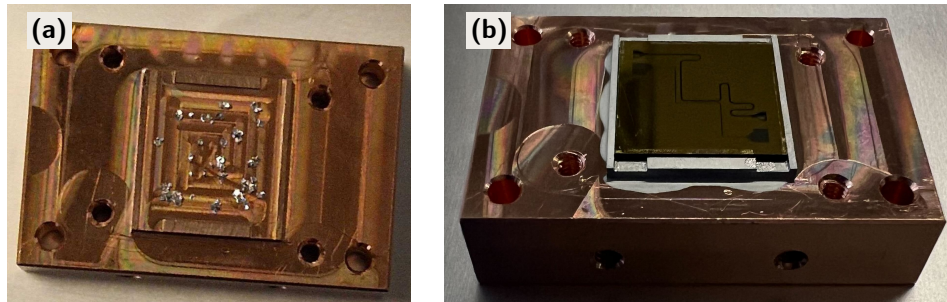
(a): Photograph of the sample holder with indium flakes for soldering of the atom chip. (b): Photograph of the atom chip soldered onto the sample holder. Some indium has flowed outside the bonding area because too much was used for soldering.
